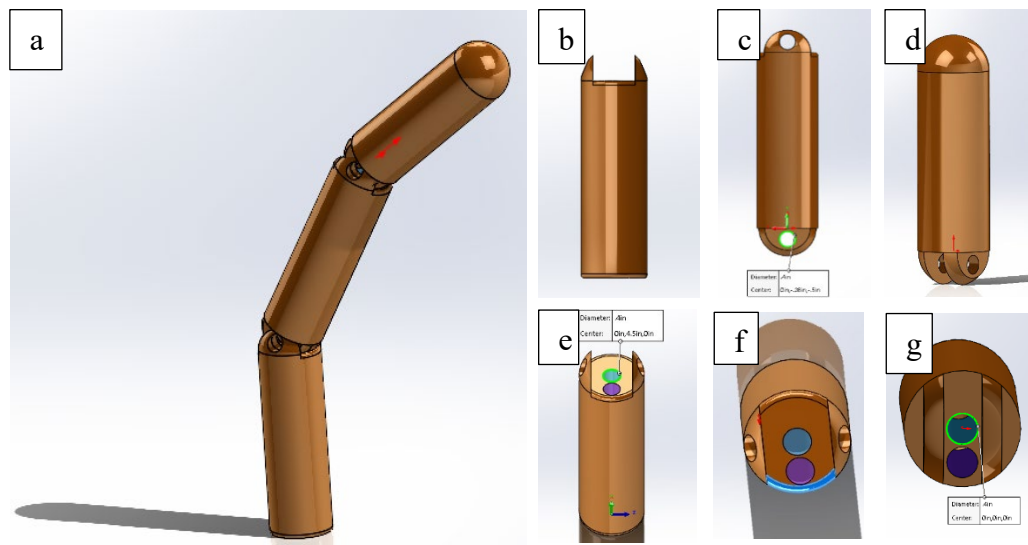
Actuator design concept 0 (a) Complete assembly (b) Base segment, front view (c) Middle segment, front view (d) Tip segment, front view (e) Base segment, isometric view (f) Middle segment, top view (g) Tip segment, bottom view
